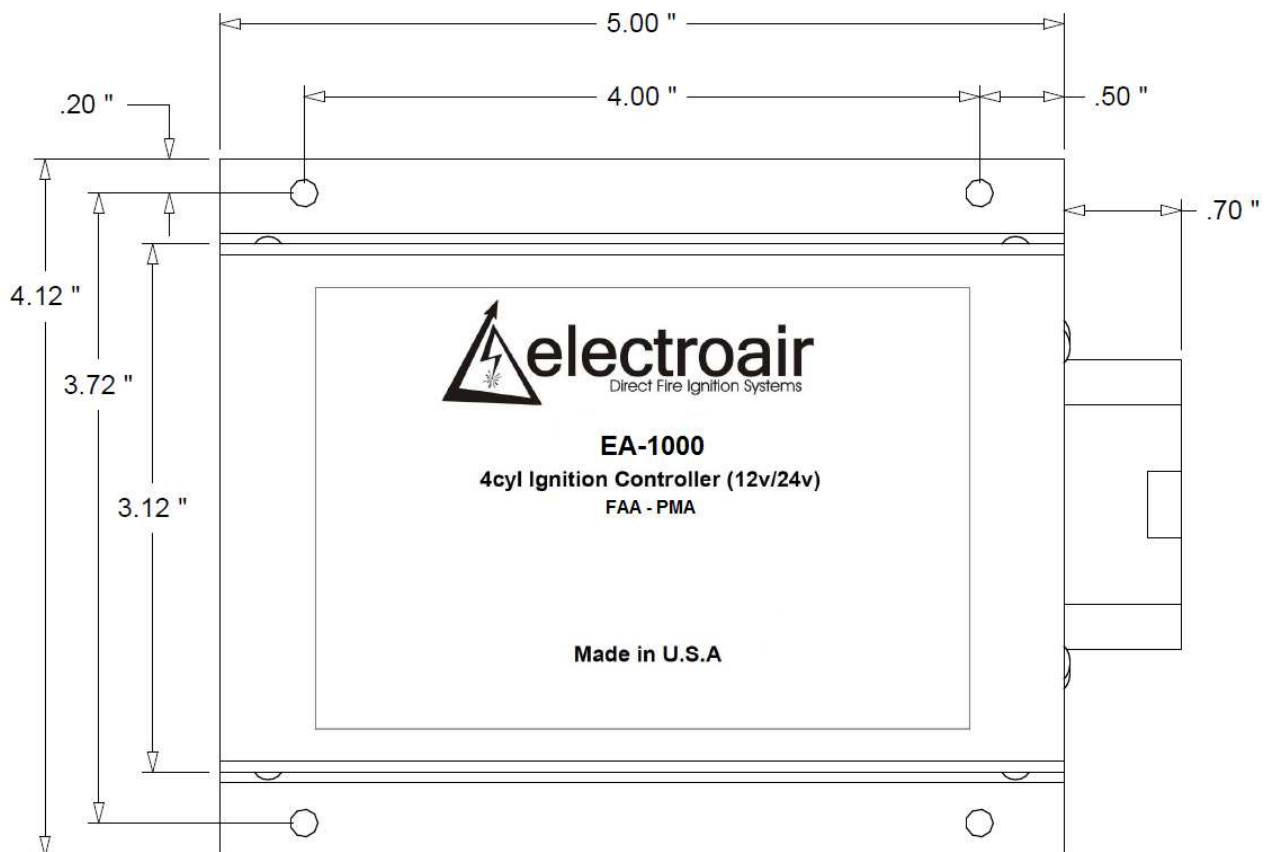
p/n: EA-1000 overall and hole dimensions
